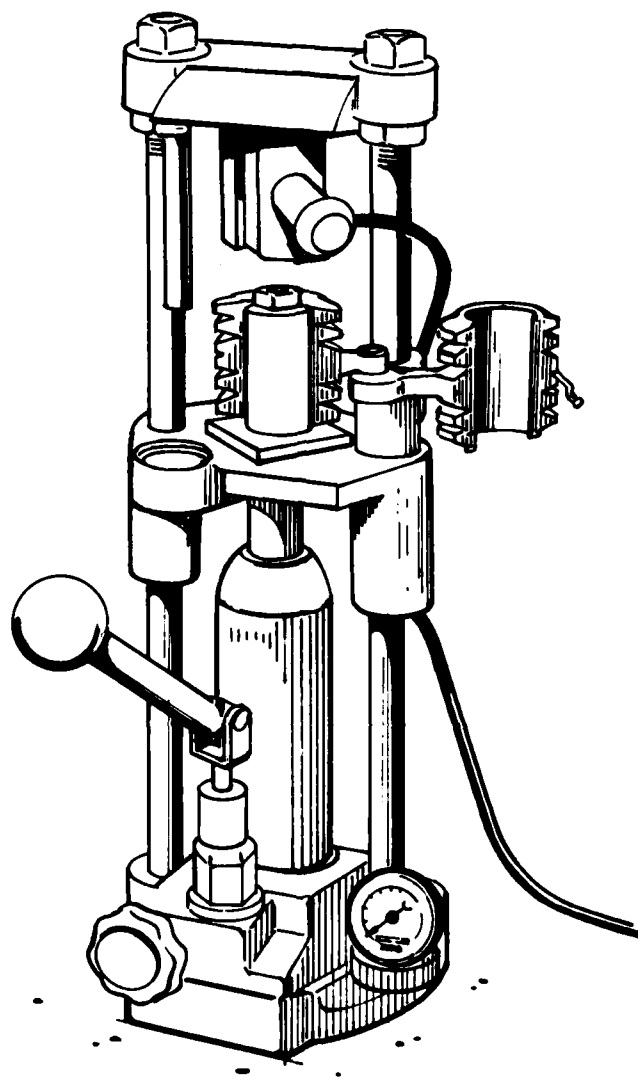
HYDRAULIC PRESS AND MOLD ASSEMBLY
